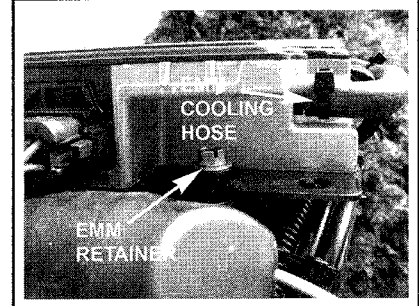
Then complete removal by disconnecting all hoses and removing the EMM mounting fasteners
